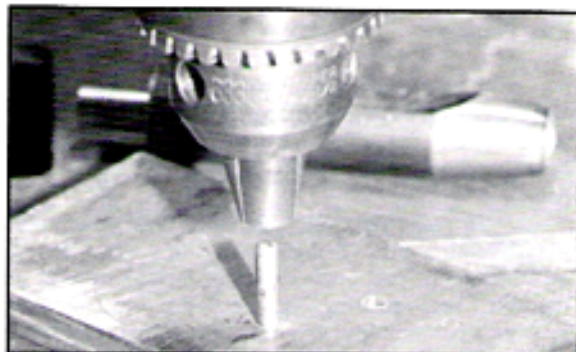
CLOSE THE DRILL CHUCK TO USE IT AS THE HEAD OF AN ARBOR PRESS TO INSTALL THE CENTERING PIN.
